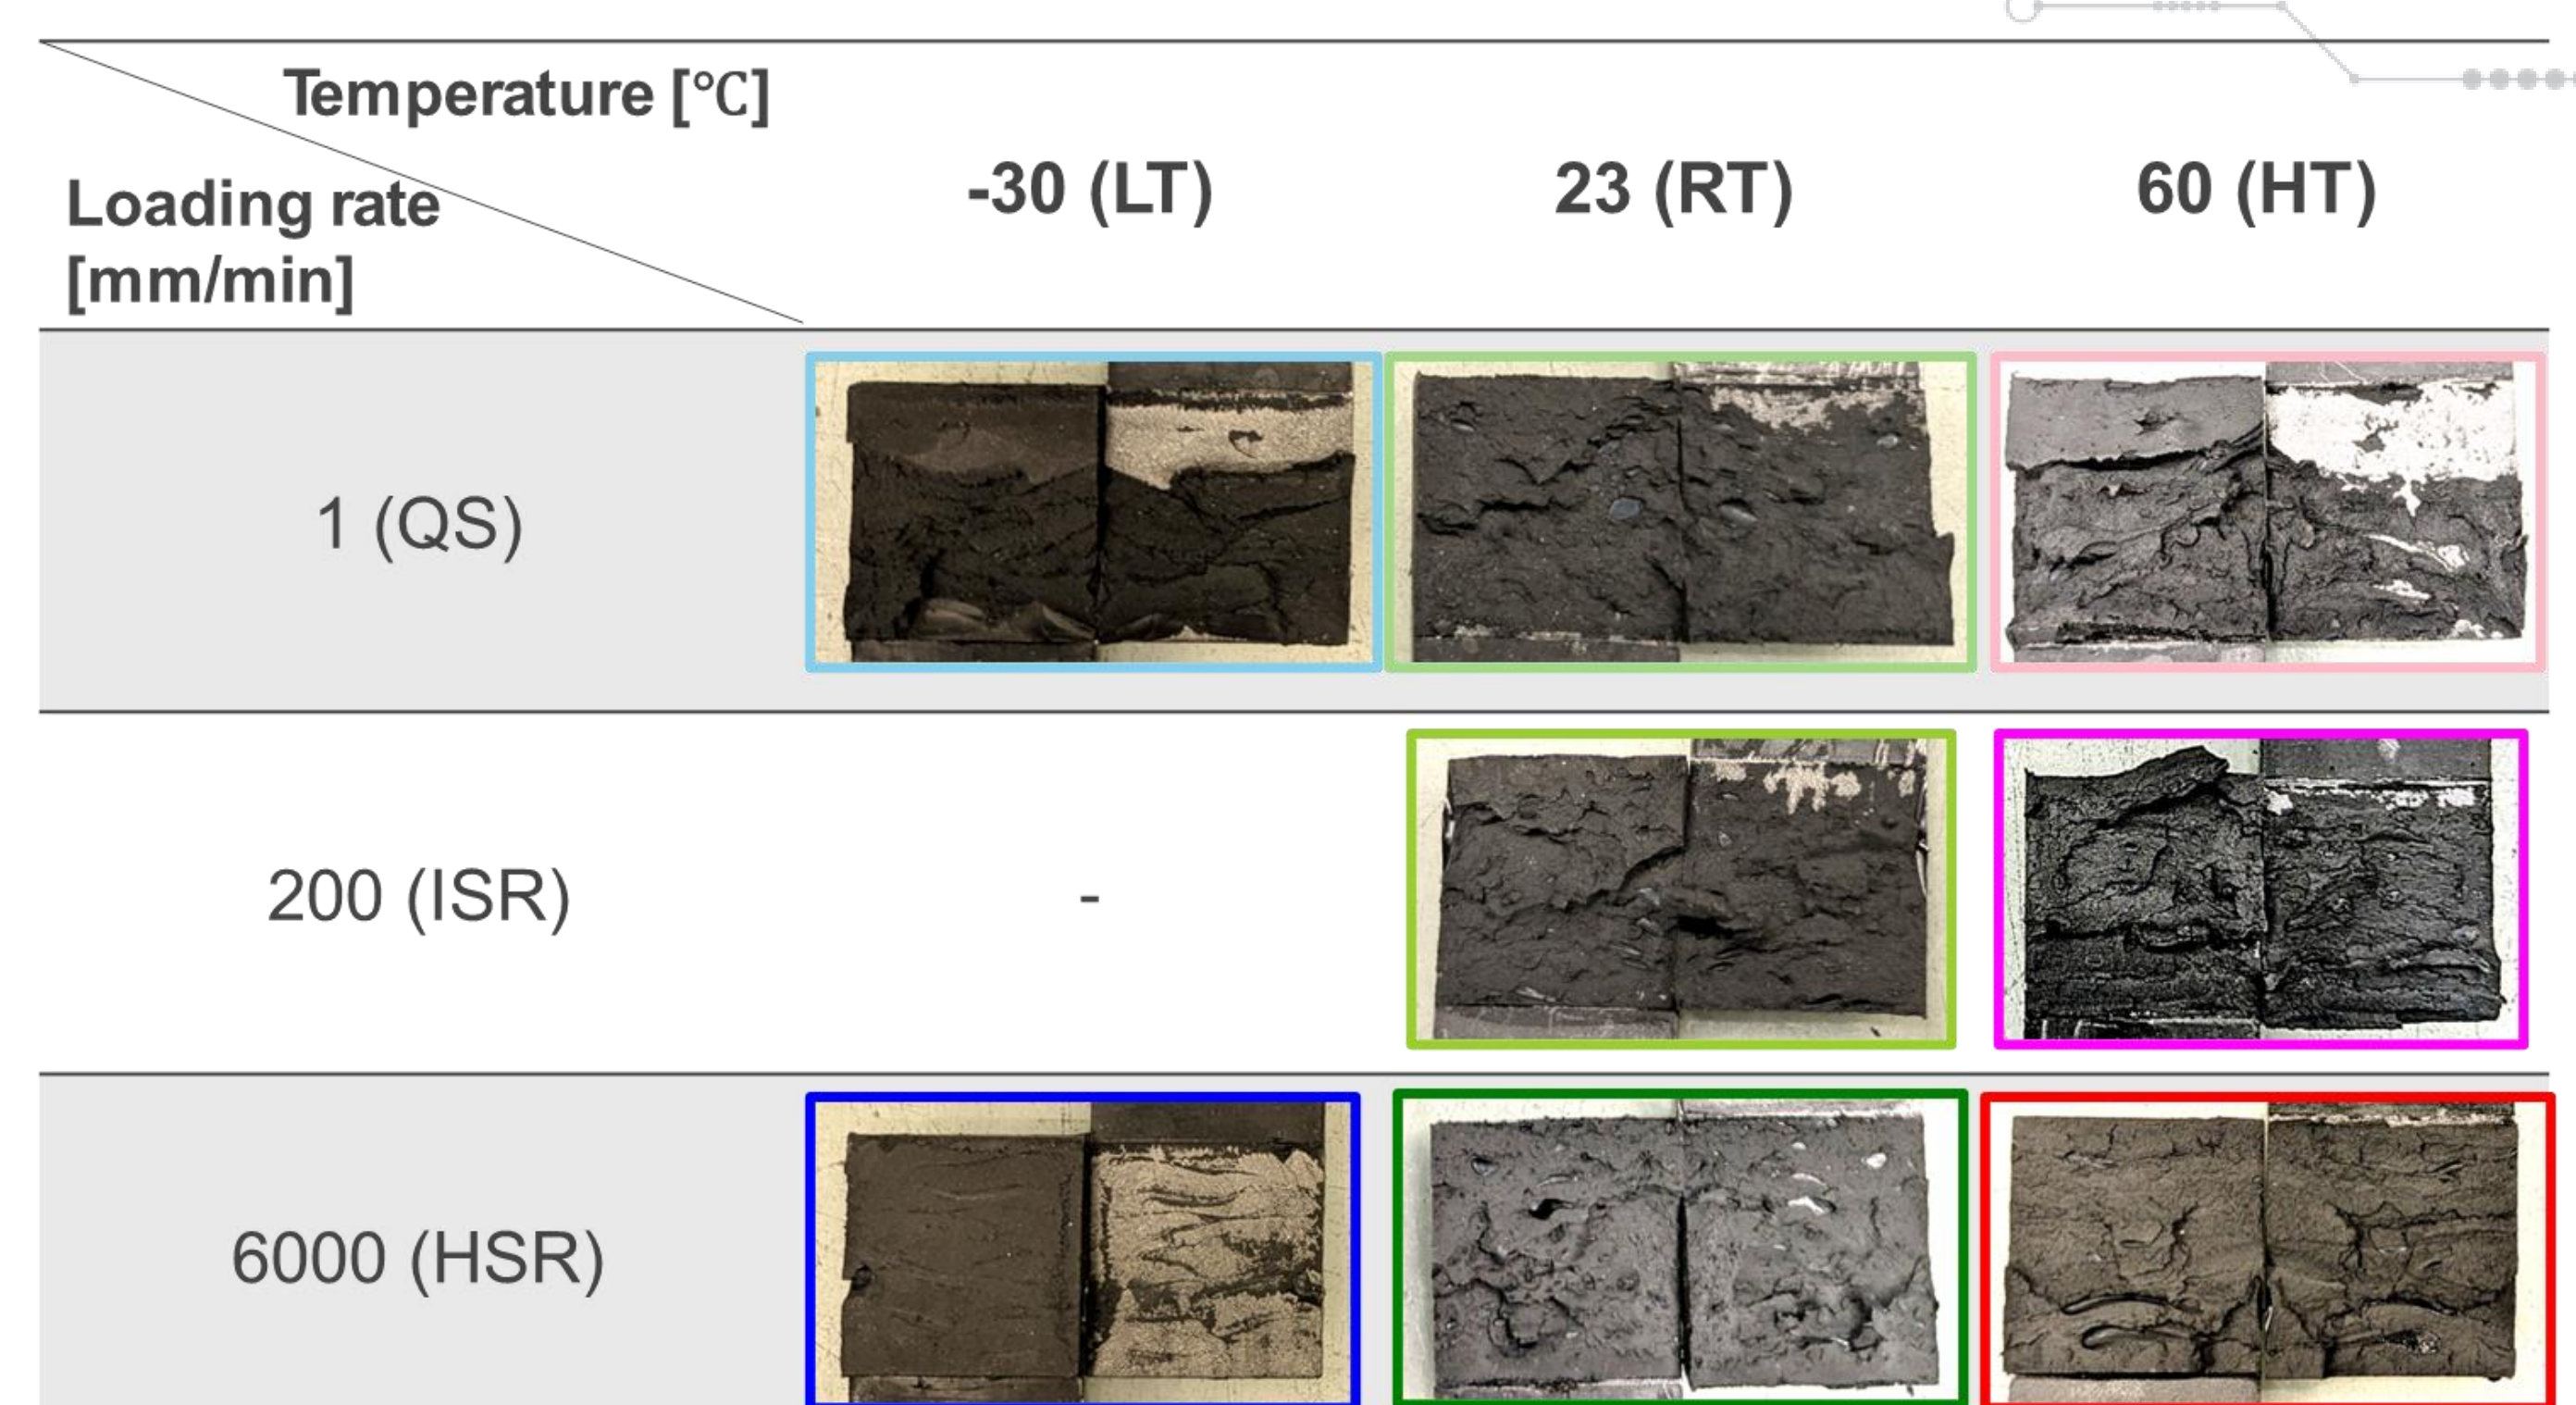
Fracture surfaces under different test conditions, showing predominately cohesive failure.
